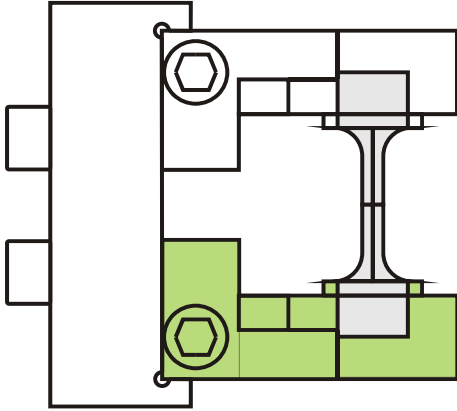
Mounting device for specimen (assembled, simplified representation).
